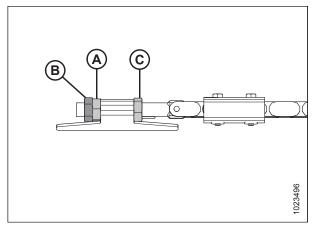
Chain Adjustment Bolt – Left Shown, Right Similar
